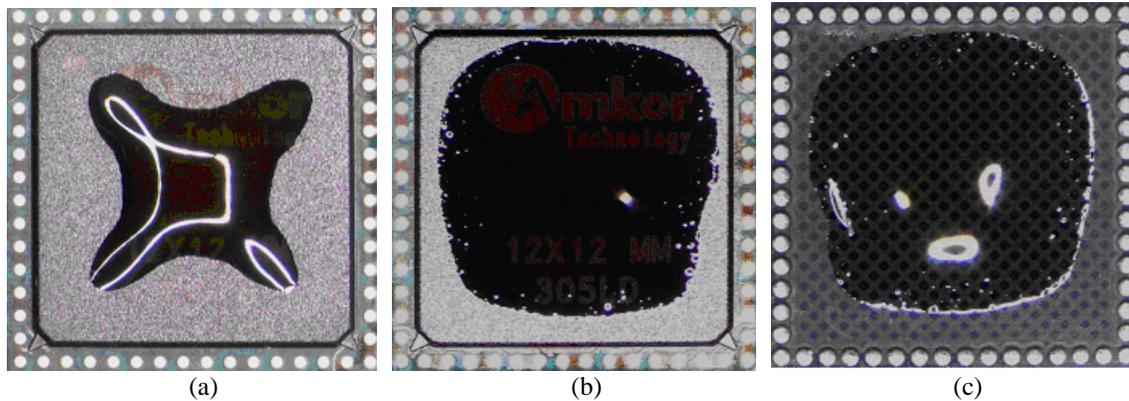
(a) Pattern dispensing on the top mold cap of the bottom package; (b) Underfill coverage after placement of top device; (c) underfill coverage on bottom of top package after placement.
